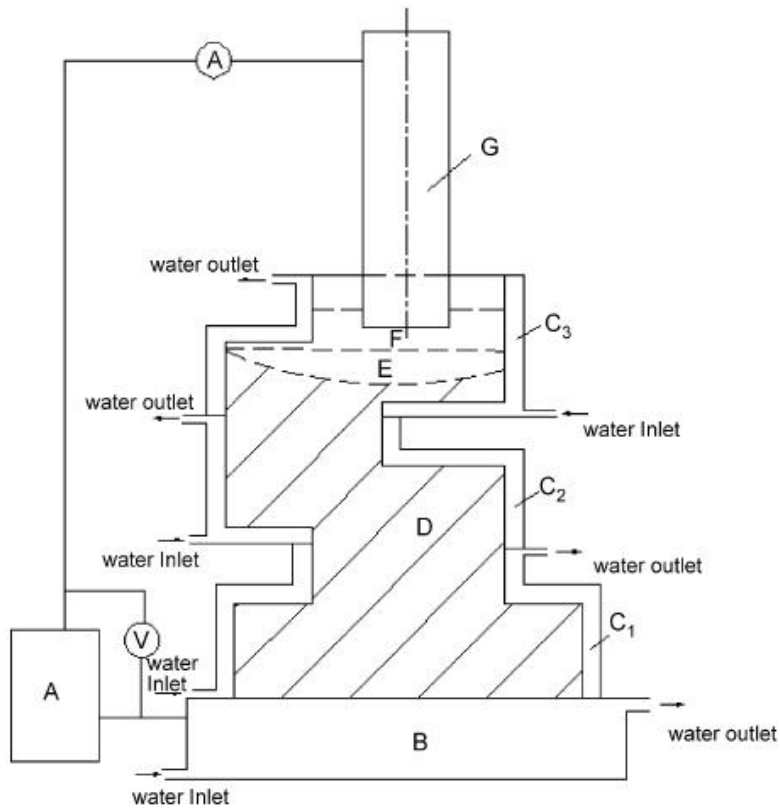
Electroslag casting (ESC) process shown schematically where A: transformer; B: Bottom mould; C1, C2, C3: mould; D: casting; E: molten metal pool; F: slag pool; G: electrode [Wang et al. 2007].
